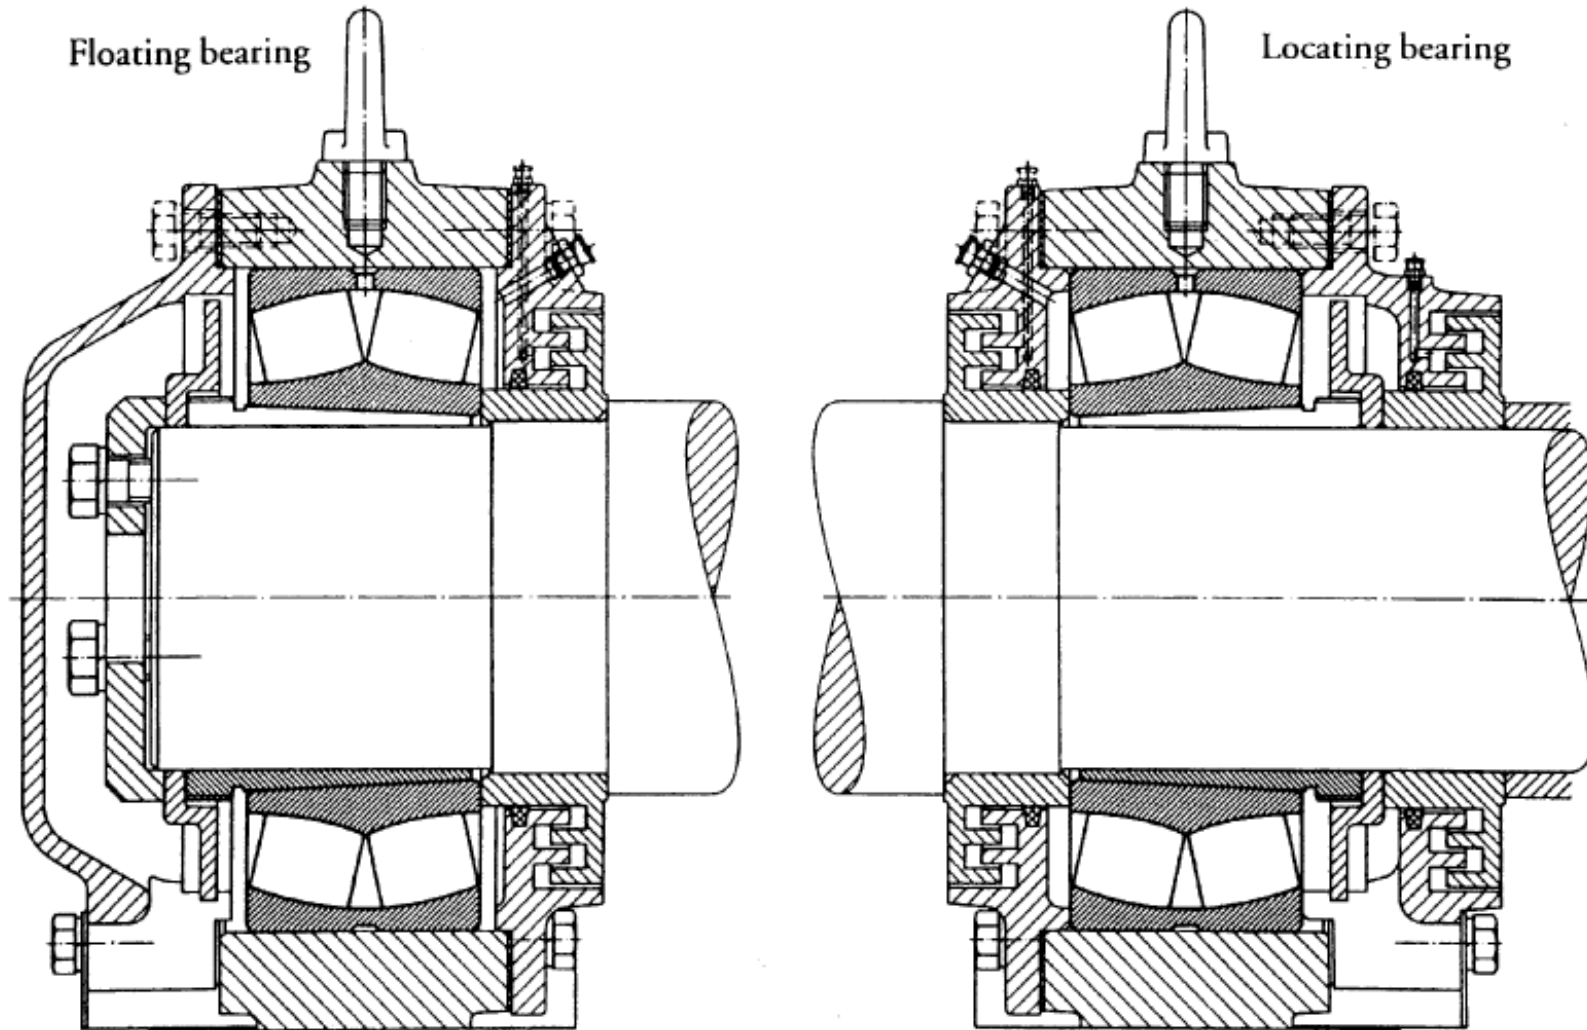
Bearing housing of a double-shaft hammer mill (from FAG,
